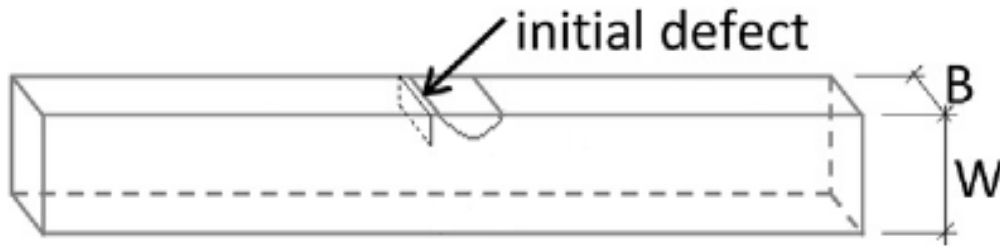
4: 4PB SEN specimen with a bead weld on a plate
